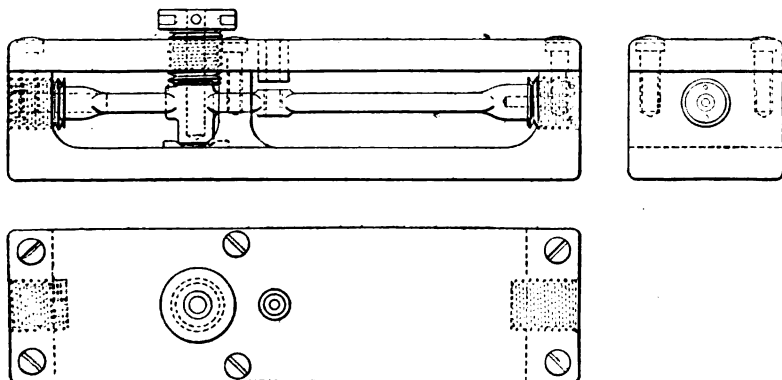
Jig for Drilling Work Shown in Fig. 56
